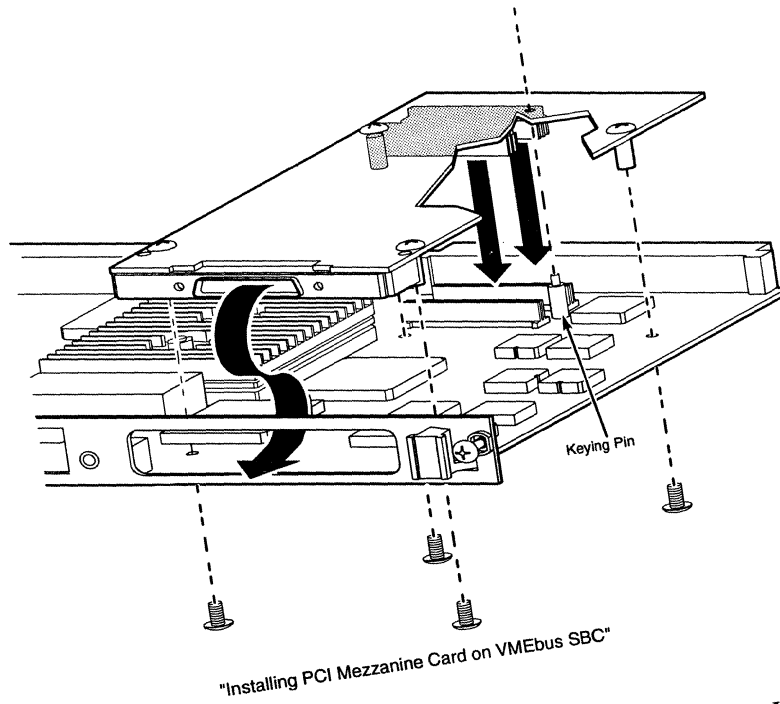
This figure illustrates how the PMC is installed on the VME board and shows the standoffs and mounting screws. Note how I/O can be taken directly out from the front panel through the PMC knockout. (Courtesy of Digital Equipment Corp.)
